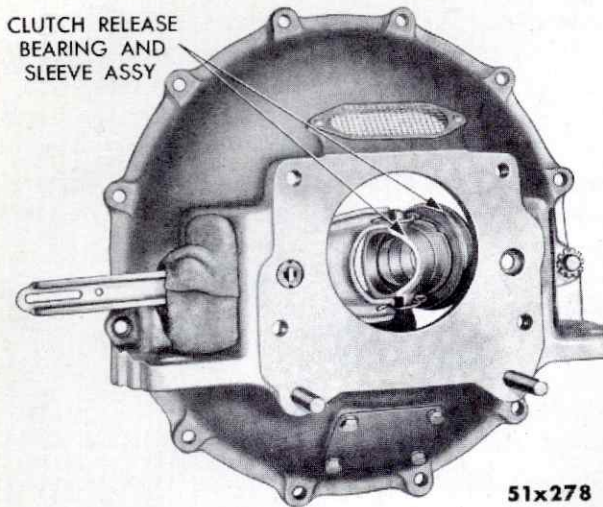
Pivoting Clutch Release Bearing for Removal or Installation
